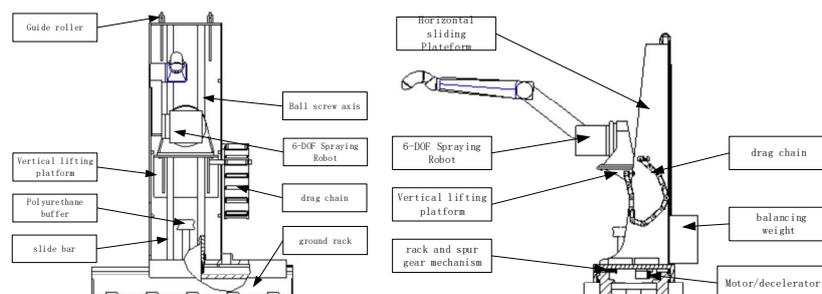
view diagram of sliding table Figure 3. side view of sliding table
